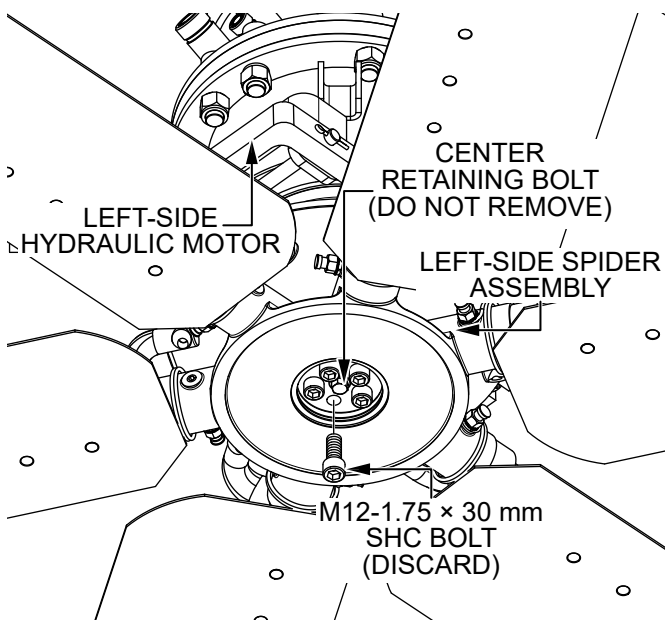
Remove Left-Side Spider Hub Cap Plug
